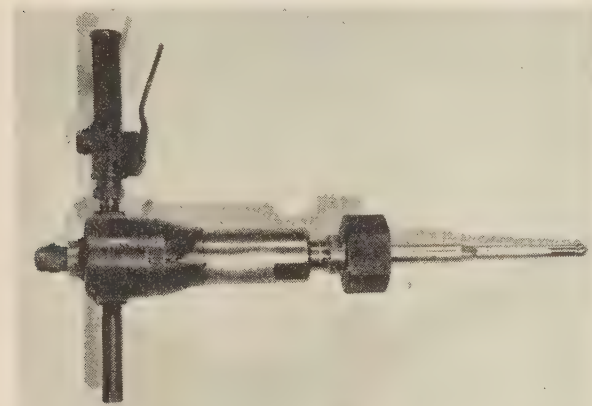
BALL-DRIFT EXPANDER AND AIR HAMMER
